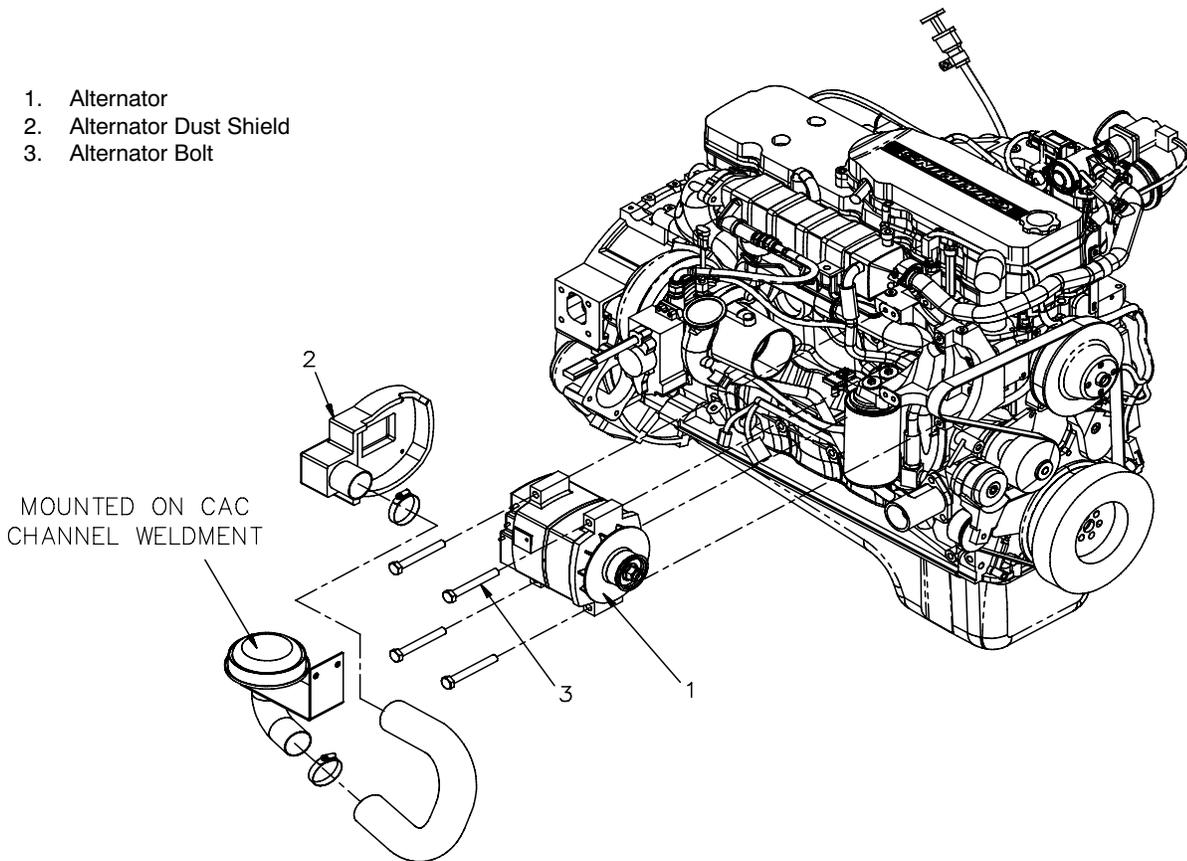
A *The Alternator is located on the engine. Remove the air conditioner belt before removing alternator belt from the fan pulley.
